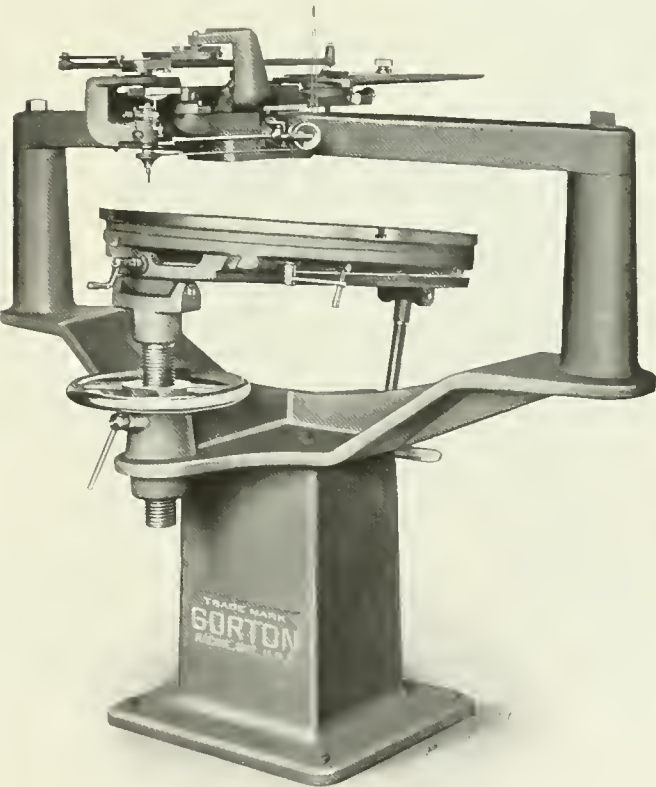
Engraving Machine specially designed for Engraving Automobile Tire Mold Rings
